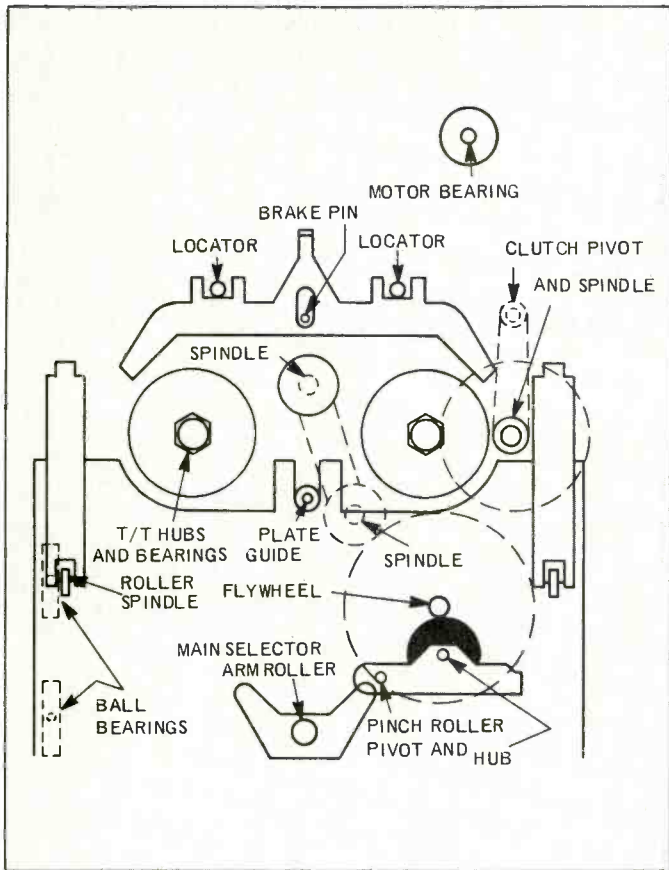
Showing lubrication chart. Apply light oil to rotating parts and medium grease to sliding parts.
